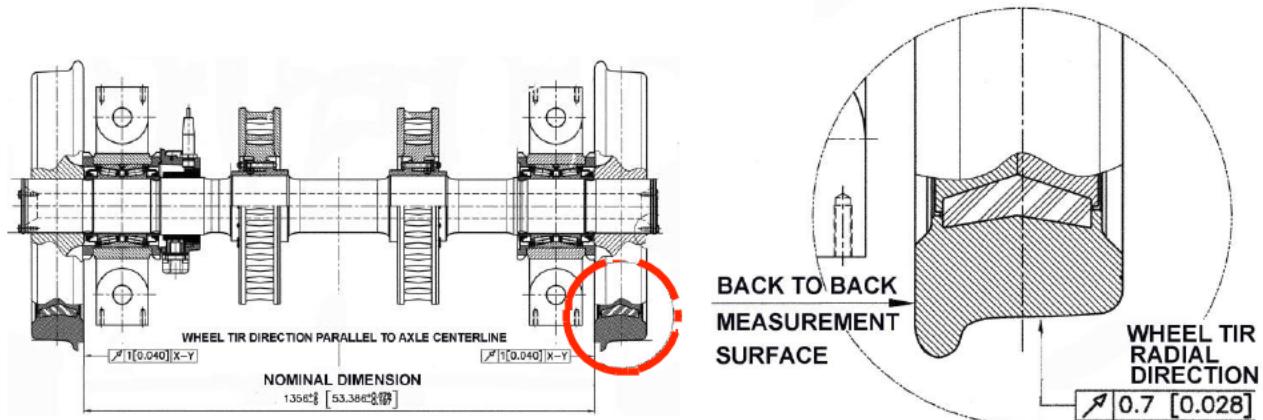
TRAILER TRUCK - WHEEL BACK TO BACK AND RUNOUT TOLERANCES
